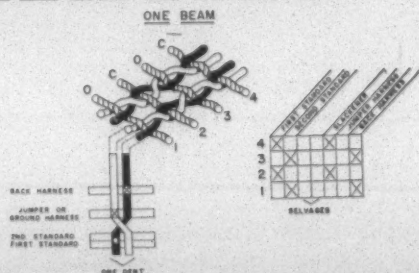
This drawing shows the chain plan, drawing-in draft, reed plan and an isometric view of one-cross-one leno weave.
